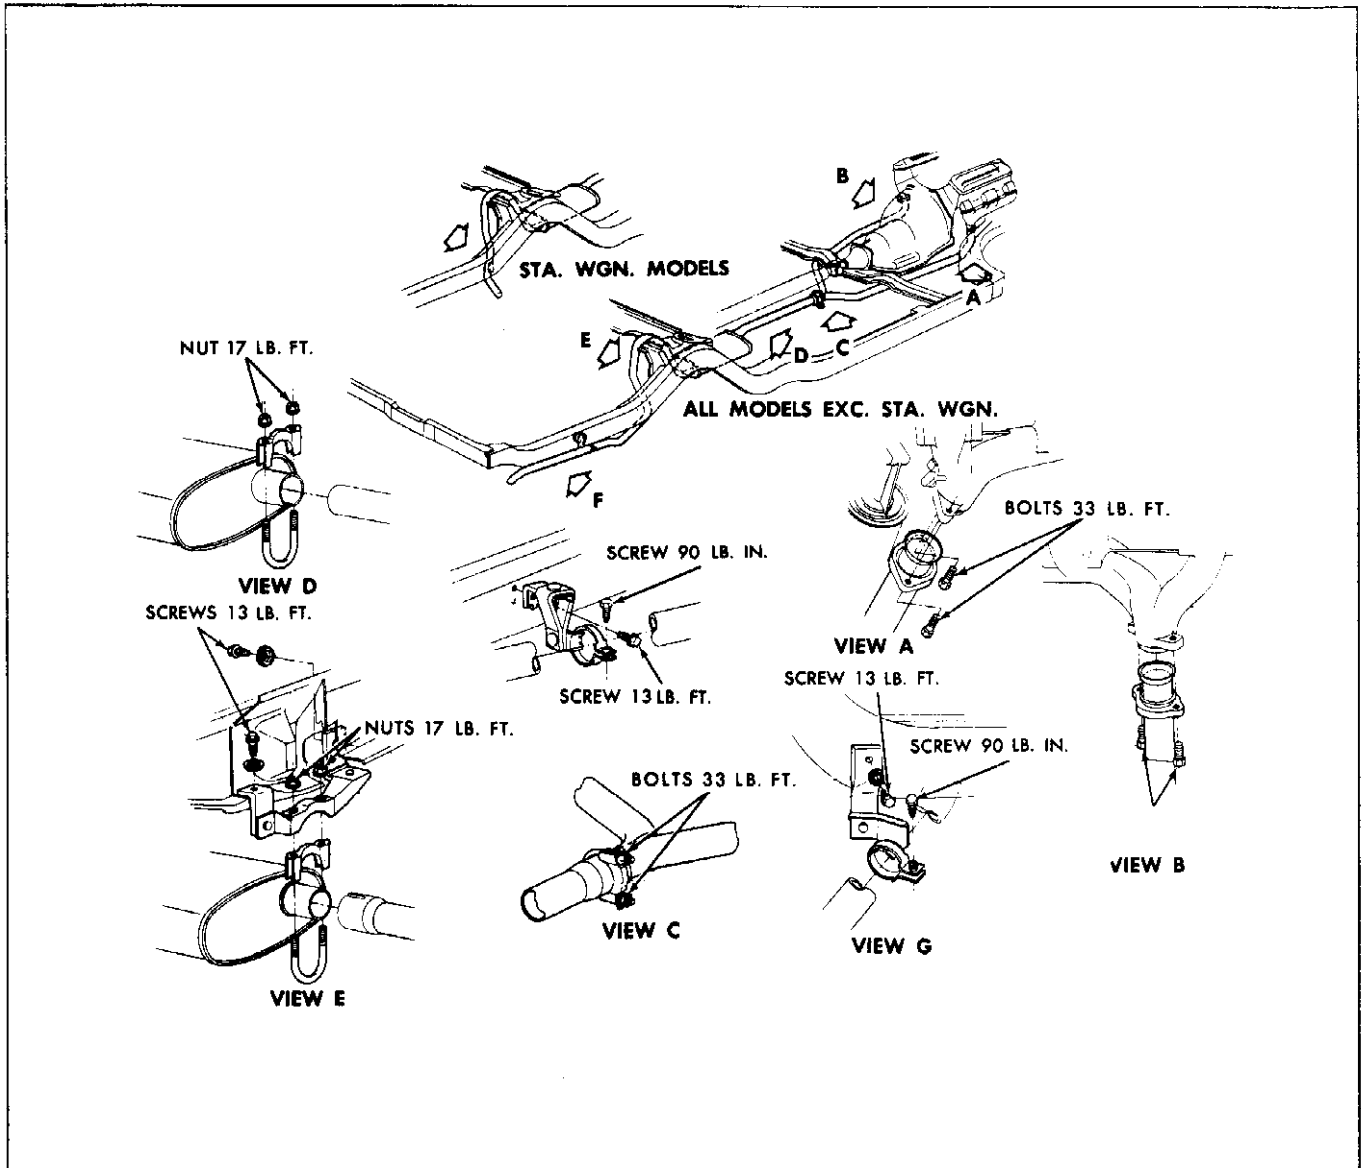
Single Exhaust System - Tempest Eight Cylinder Engine
